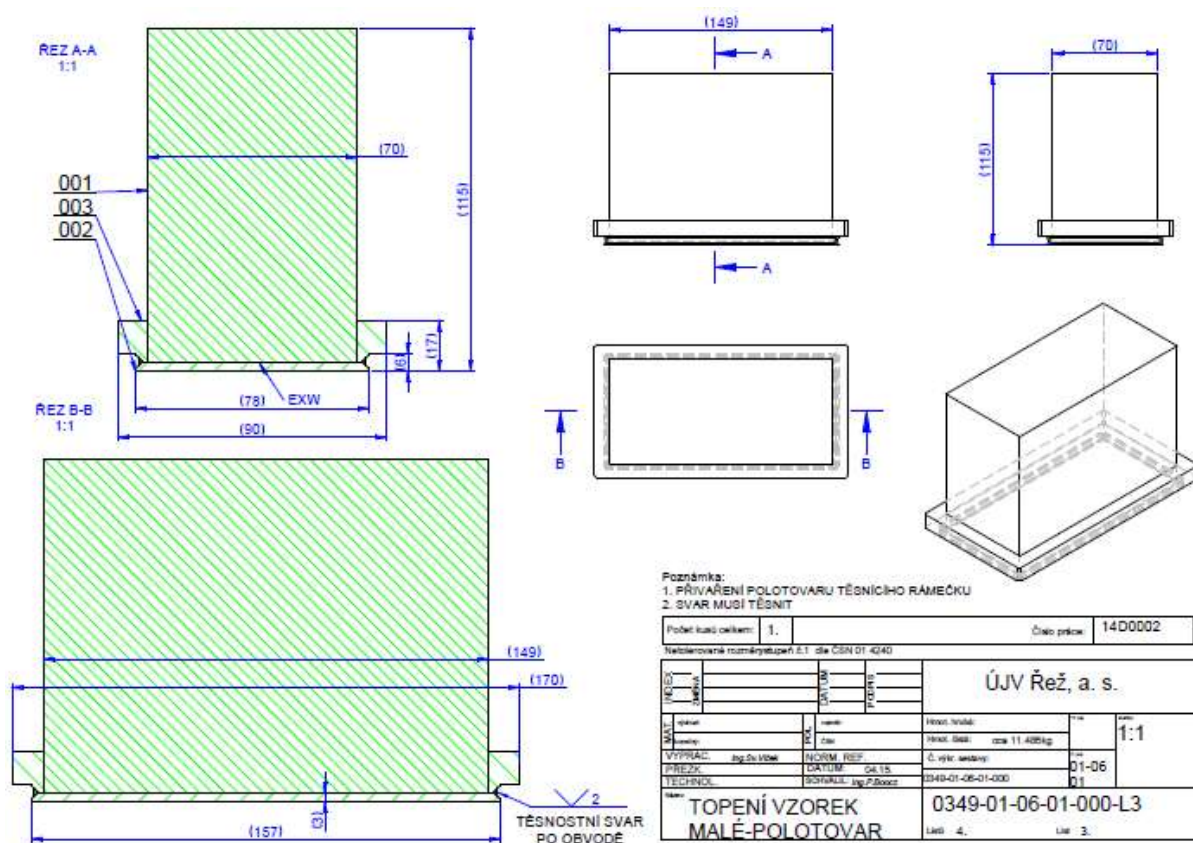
Dimension of small scale sample. Steel surface explosively welded with Cu bloc.
